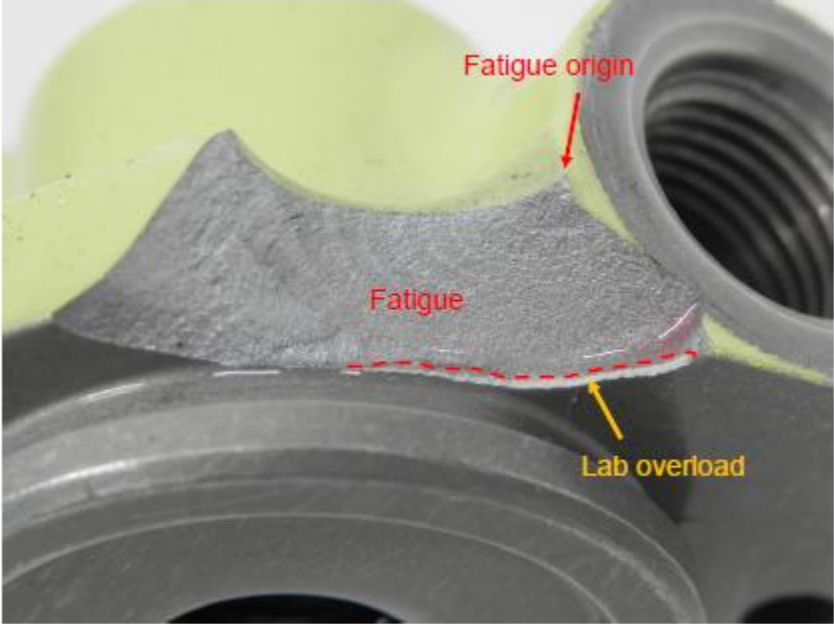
Check valve fracture surface was entirely fatigue except for a small portion of lab created overload created while opening the crack.
